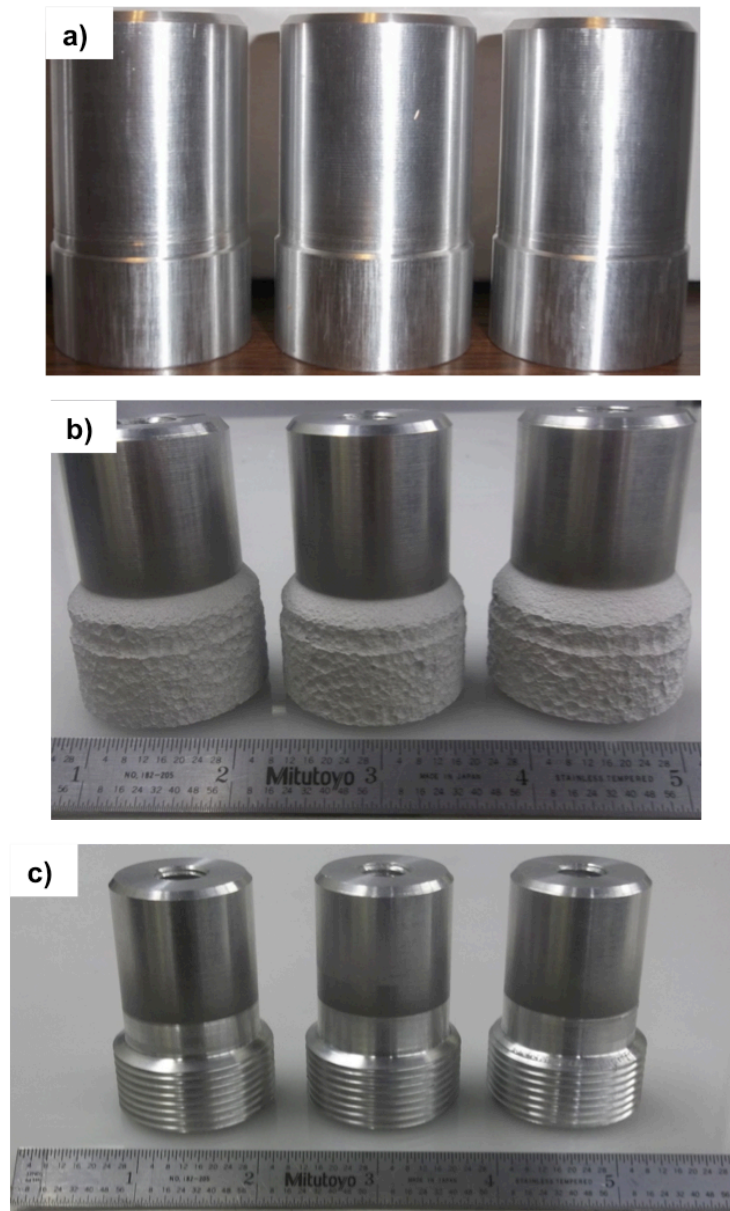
Al2024-T351 substrate full repair using Al2024 powder. a) Substrate machined to proper dimensions, b) cold spray material deposited onto the damaged area and c) threads machined into the cold spray.
